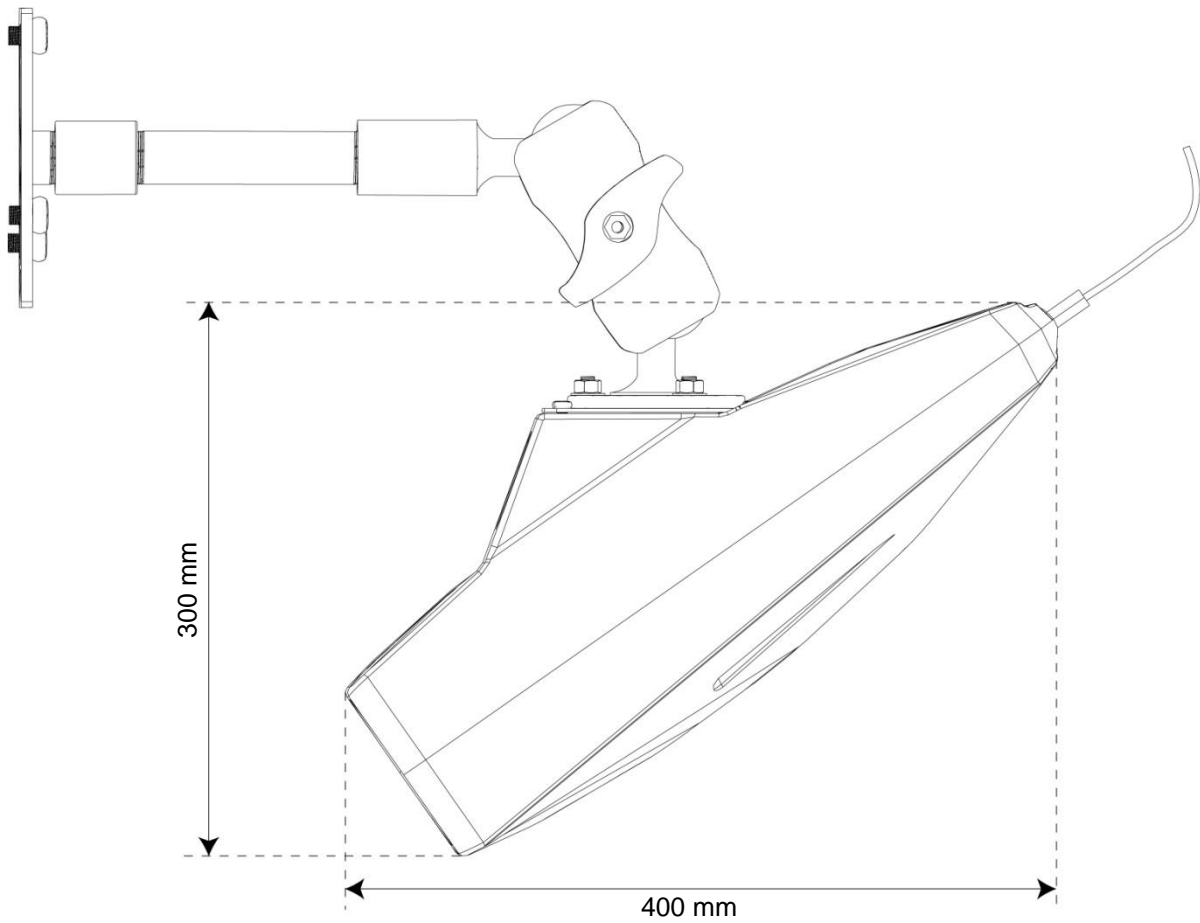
RAVEN-EYE® sensor dimensions side view as installed
